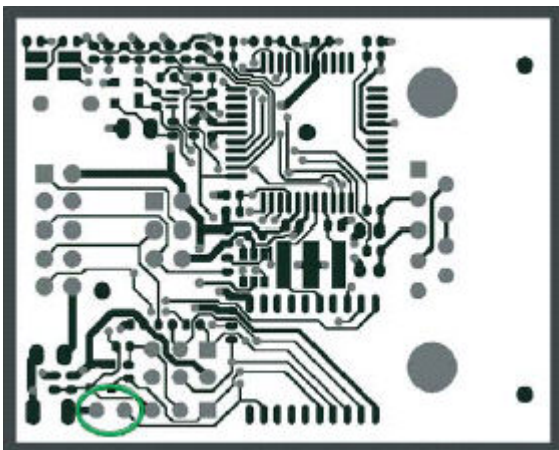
AVR ISP PCB Layout – Pin Holes Marked with Green Circle
